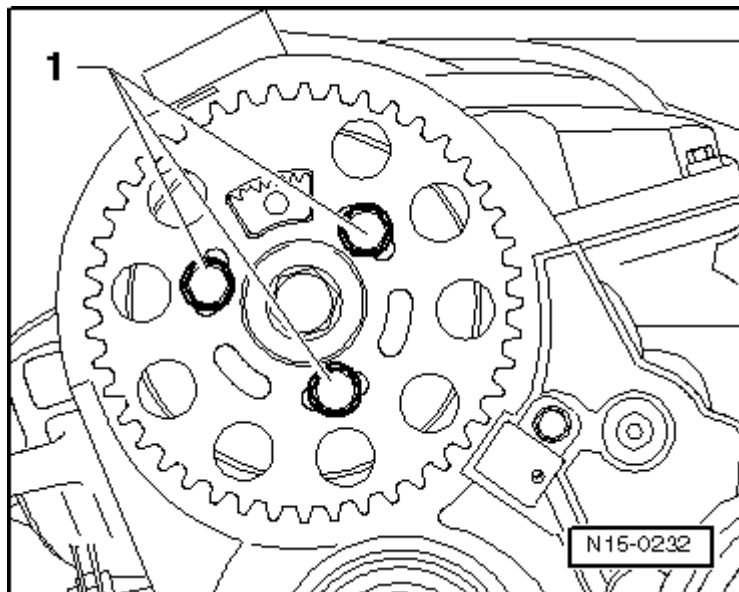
Identifying Camshaft Pulley Securing Bolts
